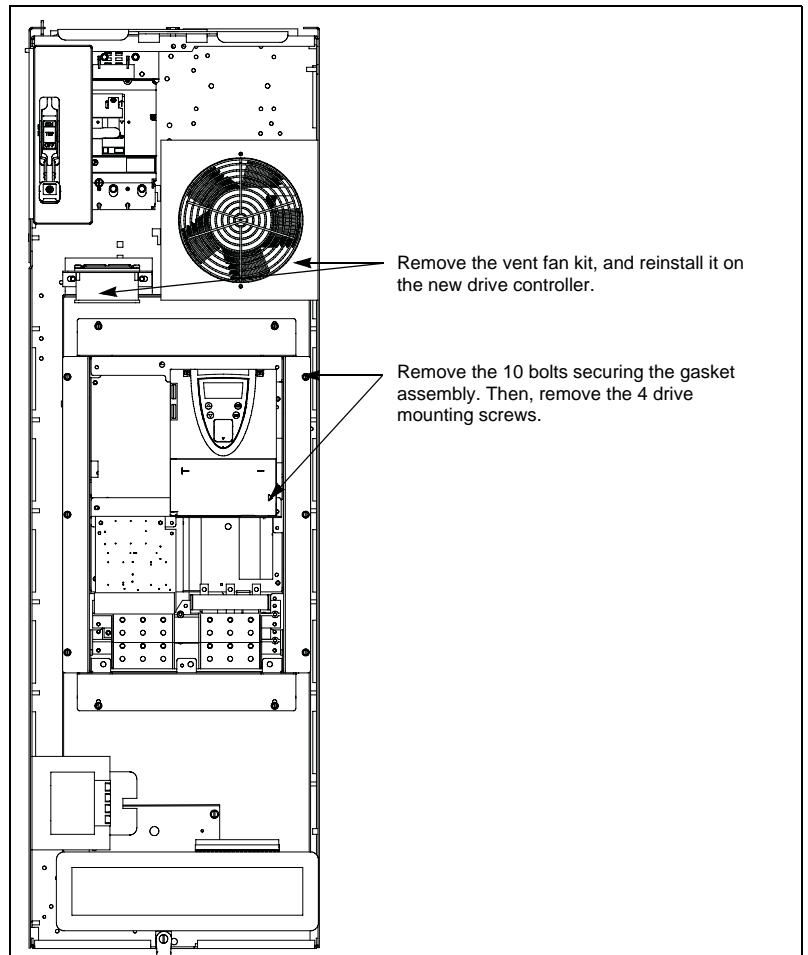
Typical Location of the Drive Controller Mounting Bolts on NEMA1/1A Units
